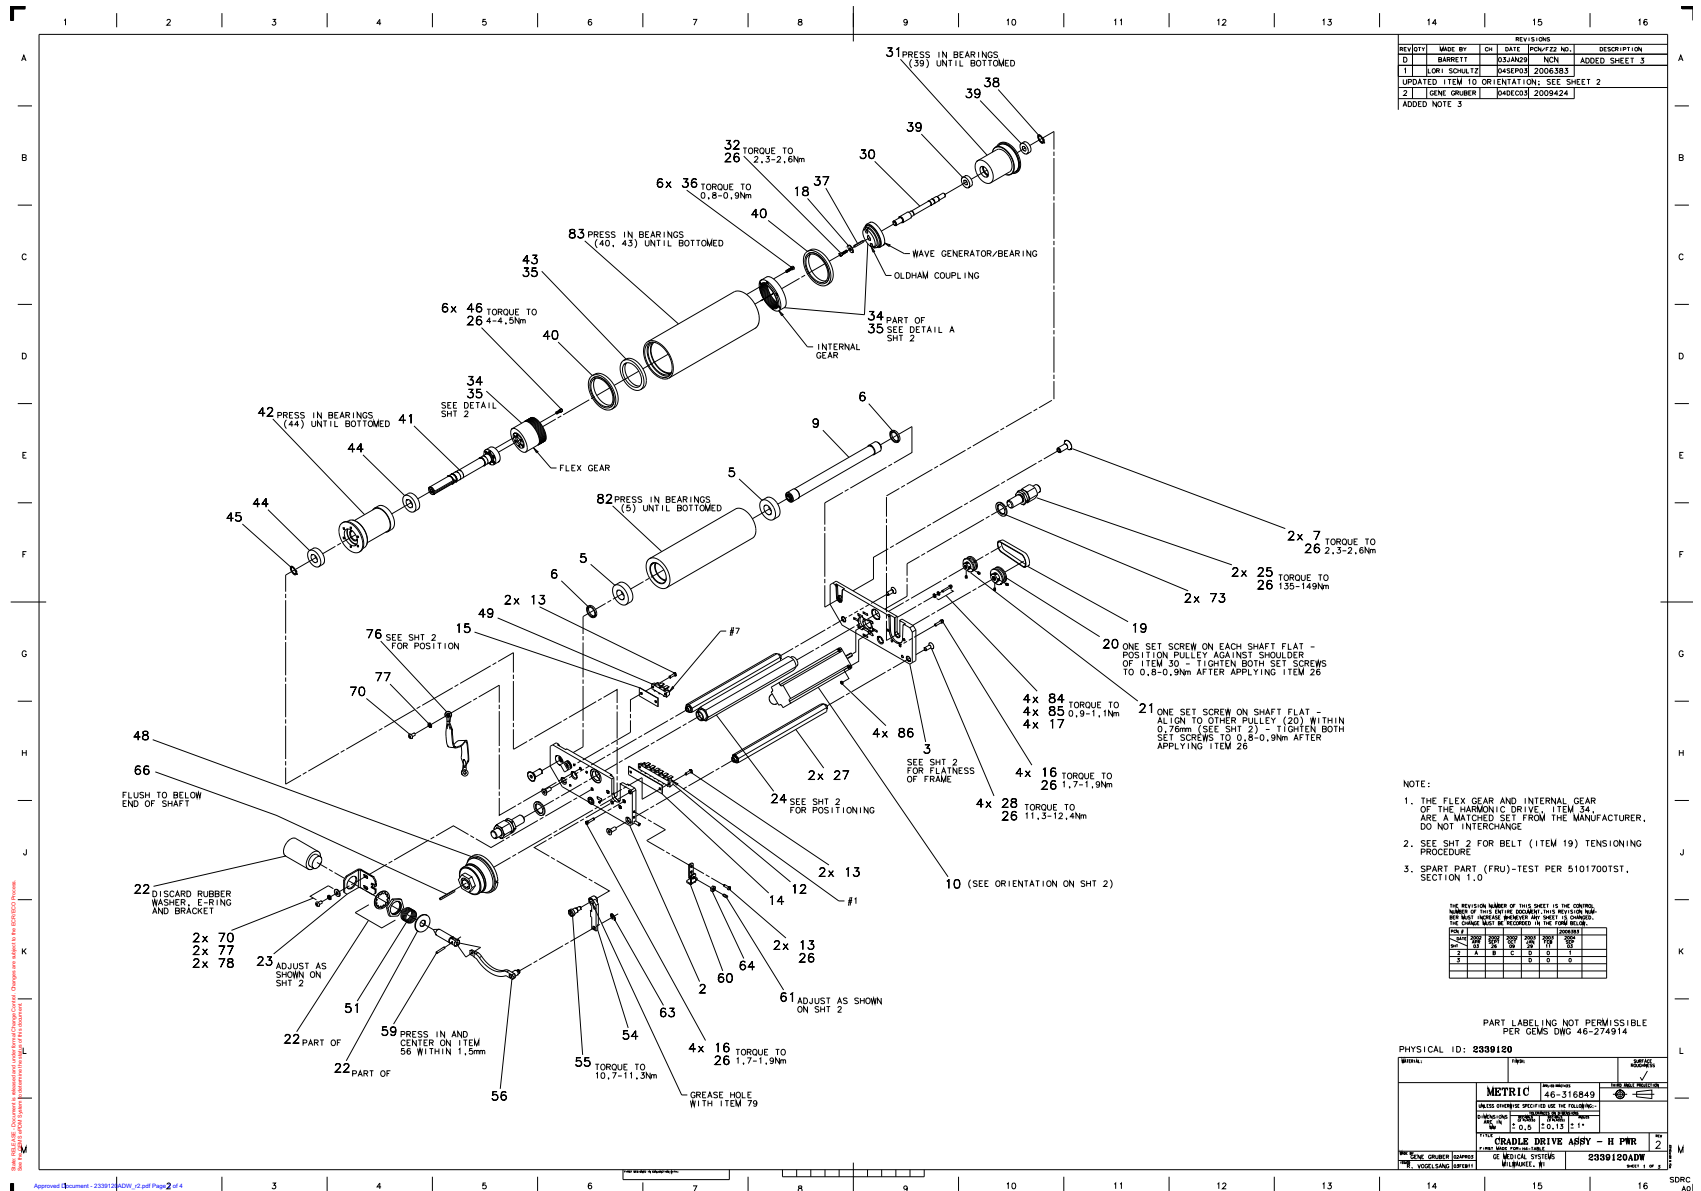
Cradle Drive Assembly (2339120, sheet 1, rev 2)
